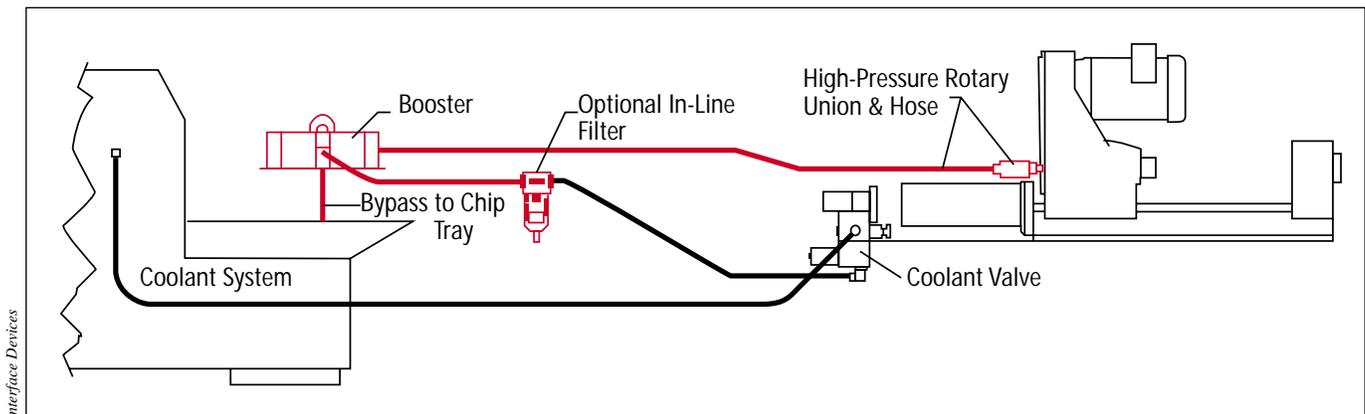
Interface Devices Inc., Milford, Conn., developed a system for gundrilling small holes. The components of the fluid-to-fluid booster (shown in red) intensify coolant-delivery pressure.
